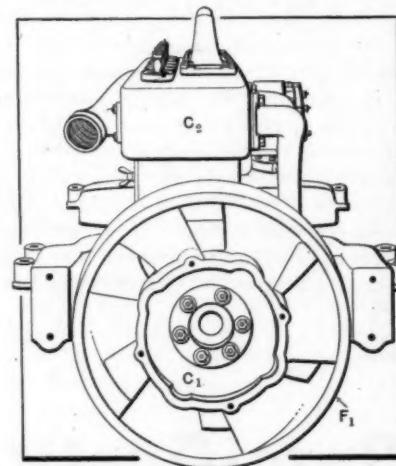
Rear end view of the motor looking into the flywheel, showing fan veins for spokes and the cavity for the clutch
